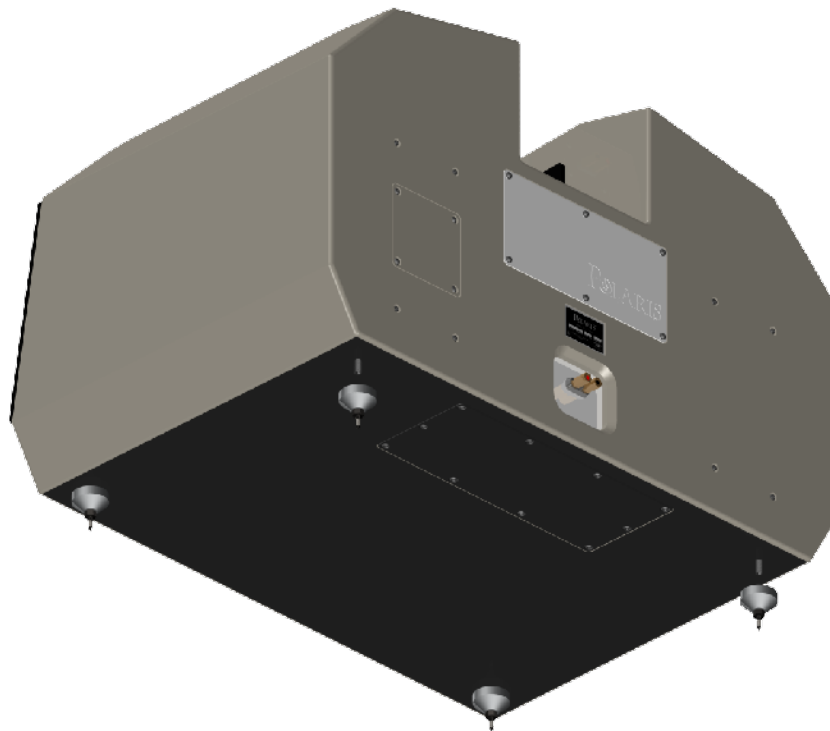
CAREFULLY THREAD THE SPIKE ASSEMBLY INTO THE PRE-DRILLED HOLES
